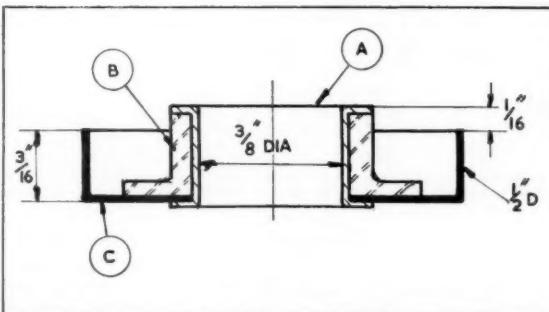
Small assemblies of this type are easily and successfully produced on this class of small press; the clear view afforded the operator makes location and handling on and off the lower tool a simple matter. A, aluminium bush; B, plastic flanged ring; C, aluminium drawn shell
